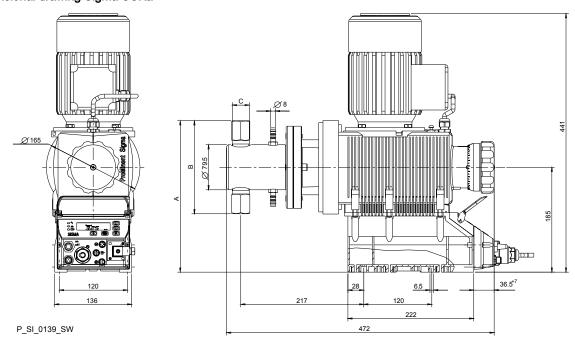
Dimensional drawing Sigma SCKa - dimensions in mm
